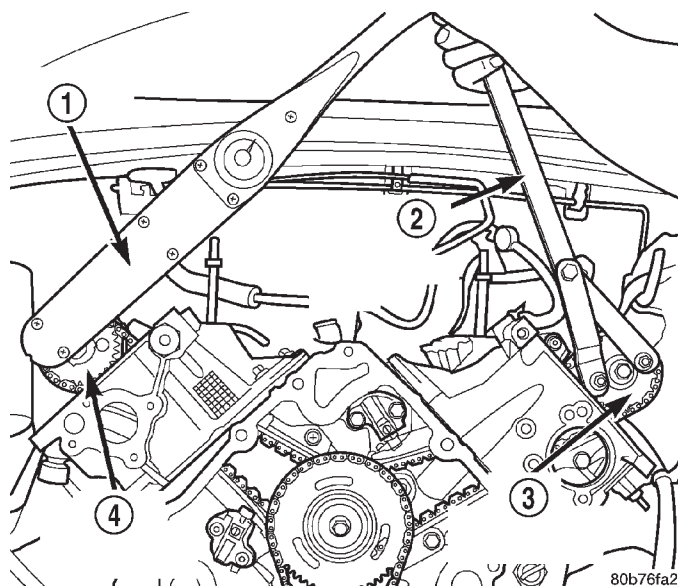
Tightening Right Side Camshaft Sprocket Bolt
